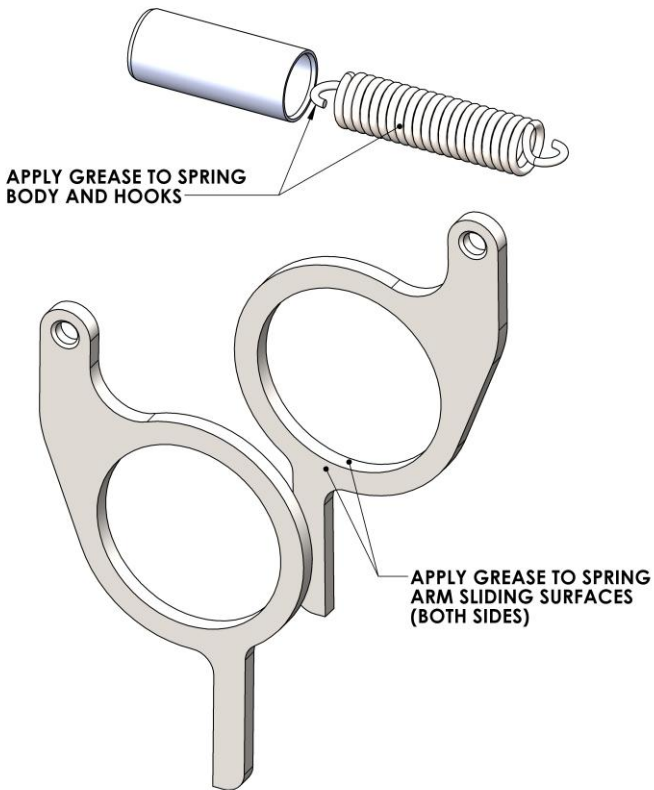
Apply grease to spring arm sliding surfaces, spring body, and spring hooks
